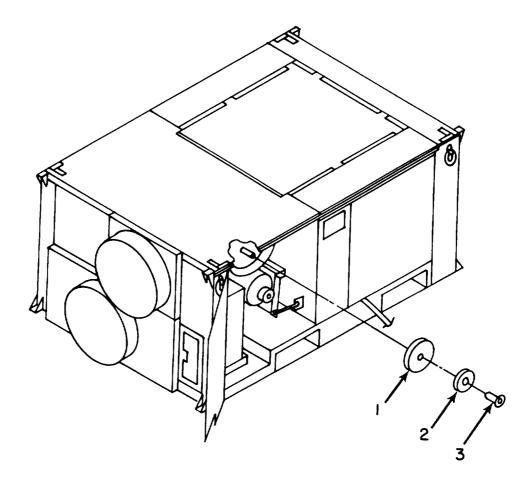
Evaporator Blower and Motor Speed Adjustment
